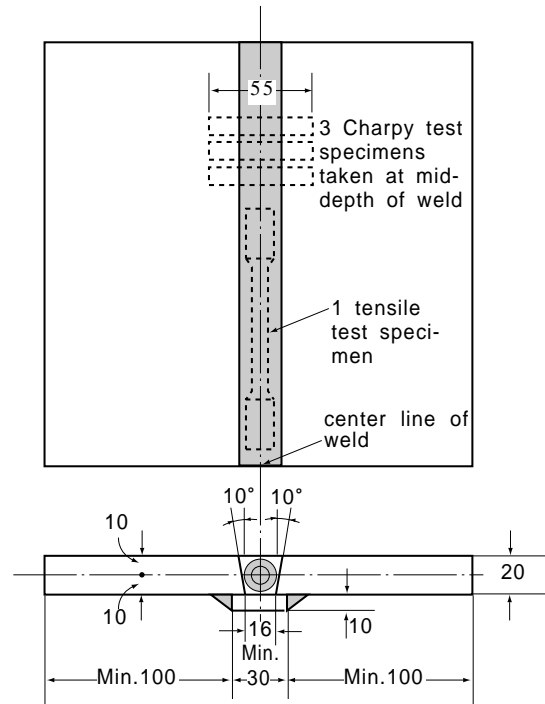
Deposited Metal Test Assembly for Electrode for Manual Arc Welding (unit : mm)
